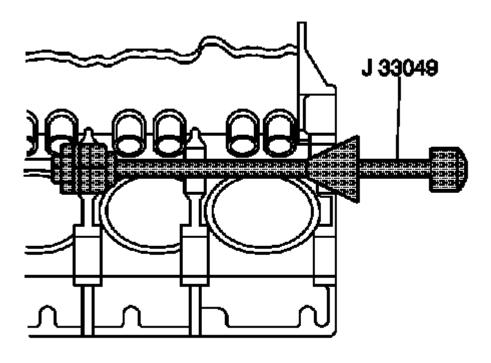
Removing/Installation Camshaft Inner Bearing Using J 33049 Courtesy of GENERAL MOTORS CORP.
